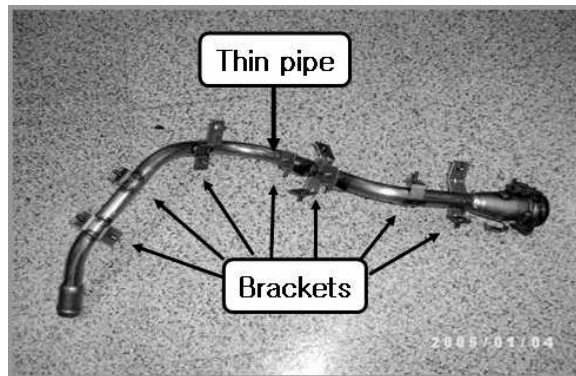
Thin pipe and brackets with many both sides lab joint fillet welds in fuel filler neck
